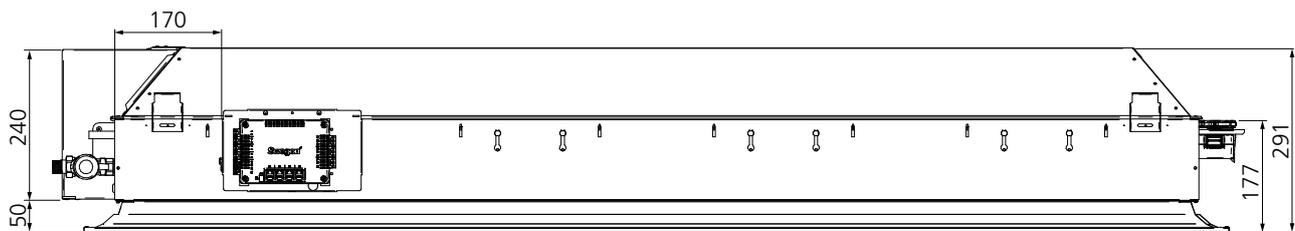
Dimensional drawing, side view. Air connection on the long side - pos 2.
